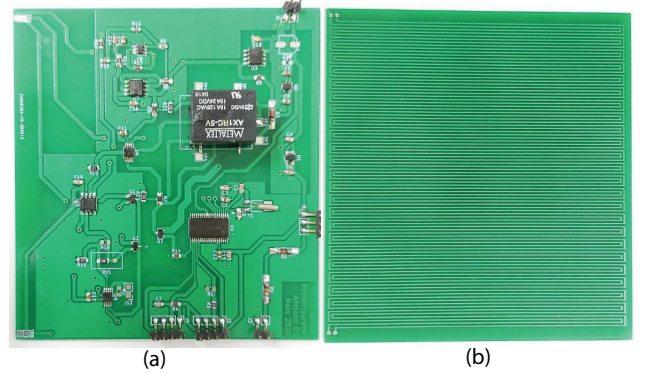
Photograph of the PCB sensor with the signal processing circuits: (a) top side, with the components soldered; (b) bottom side, with the fringing field capacitor.
